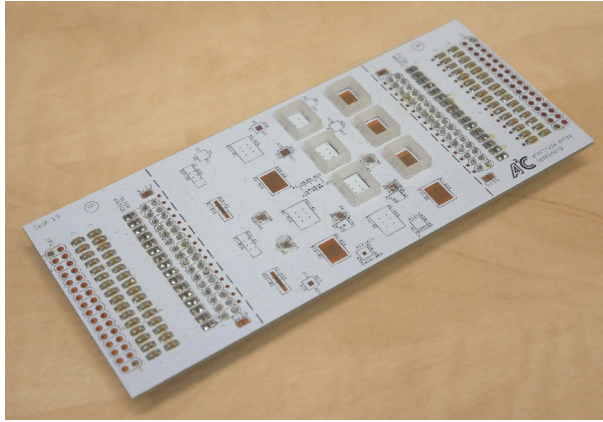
A standard printed circuit board technology was used to create a board with many various layouts of electrodes for testing the micro-assembly task.
